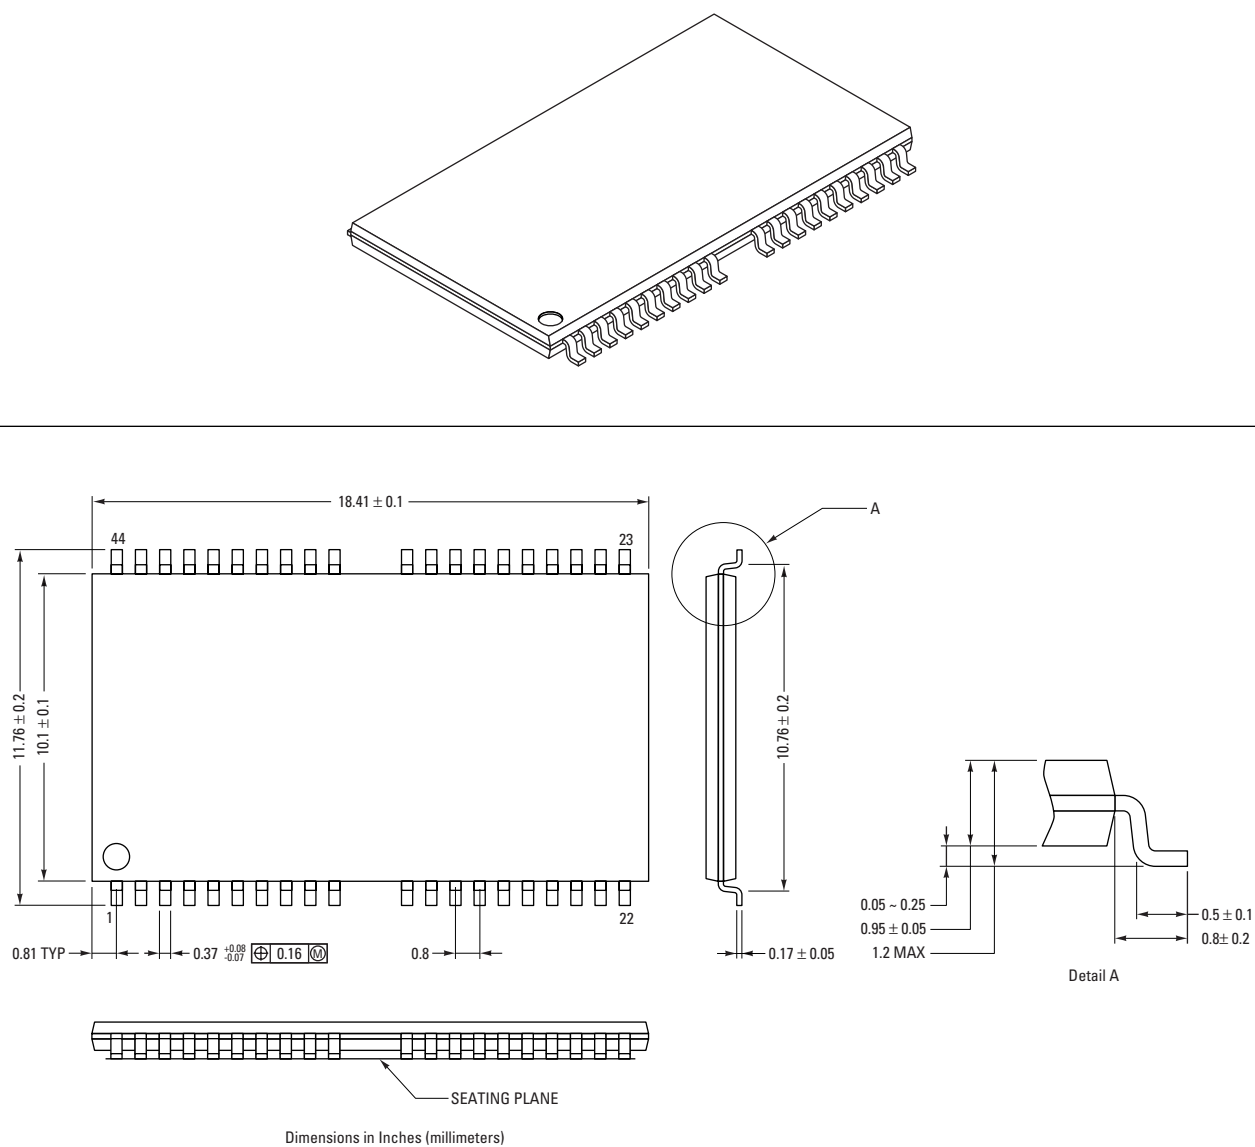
40/44-Pin TSOP (Type II) Package Dimensions
